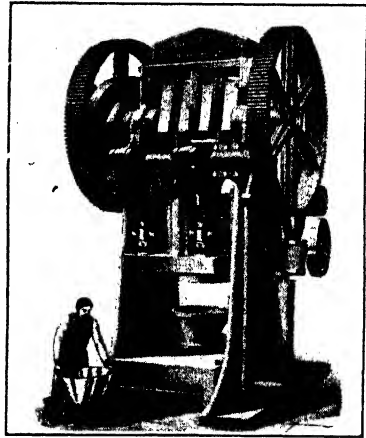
The connecting link between the cam and toggle presses, a machine of about 1890, in which both mechanisms were combined to obtain the blank-holding action.
